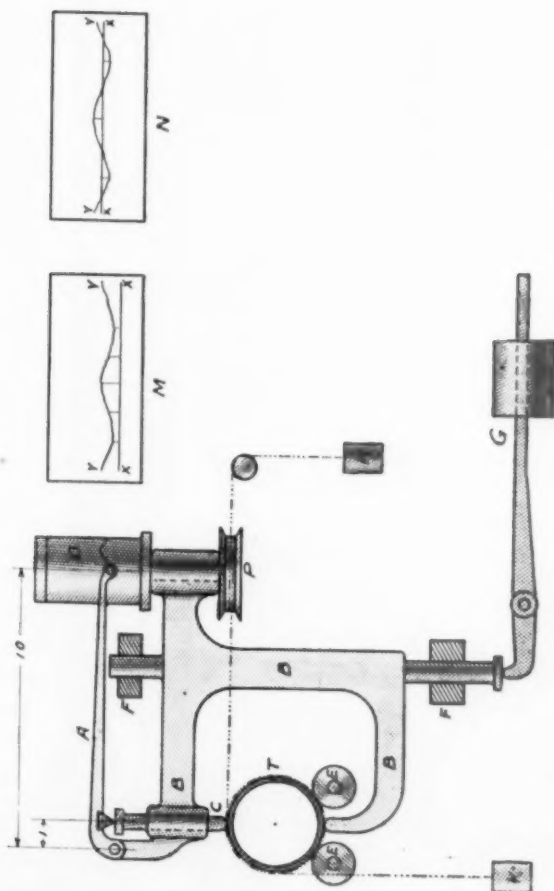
SKETCH SHOWING THE PRINCIPLE OF ACTION OF AUTOGRAPHIC CALIPERING APPARATUS NO. 2.
